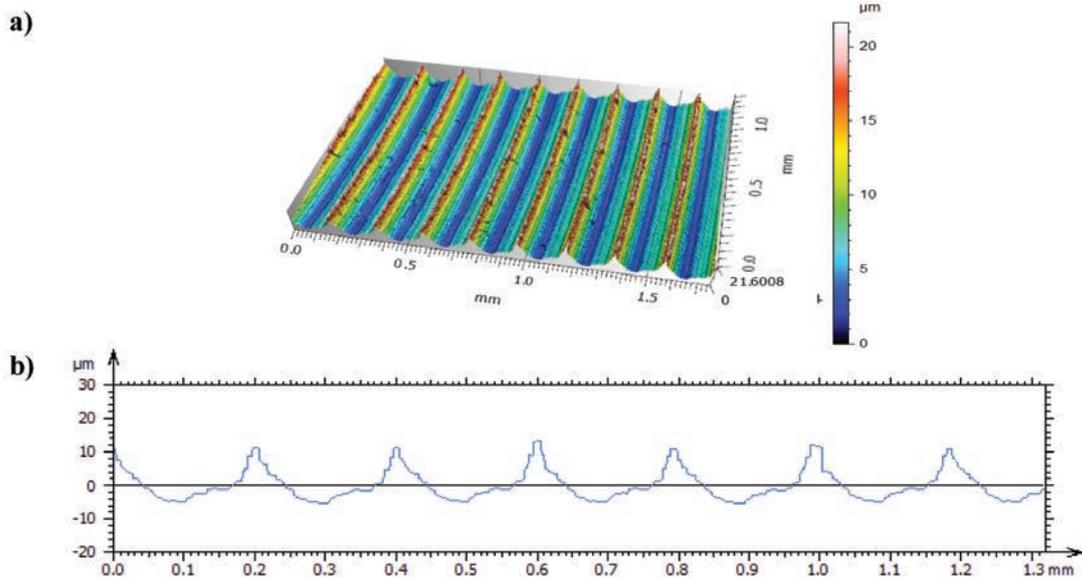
Surface texture of the edge of the workpiece after dry turning with a cemented carbide cutting tool: a) isometric view, b) primary profile
